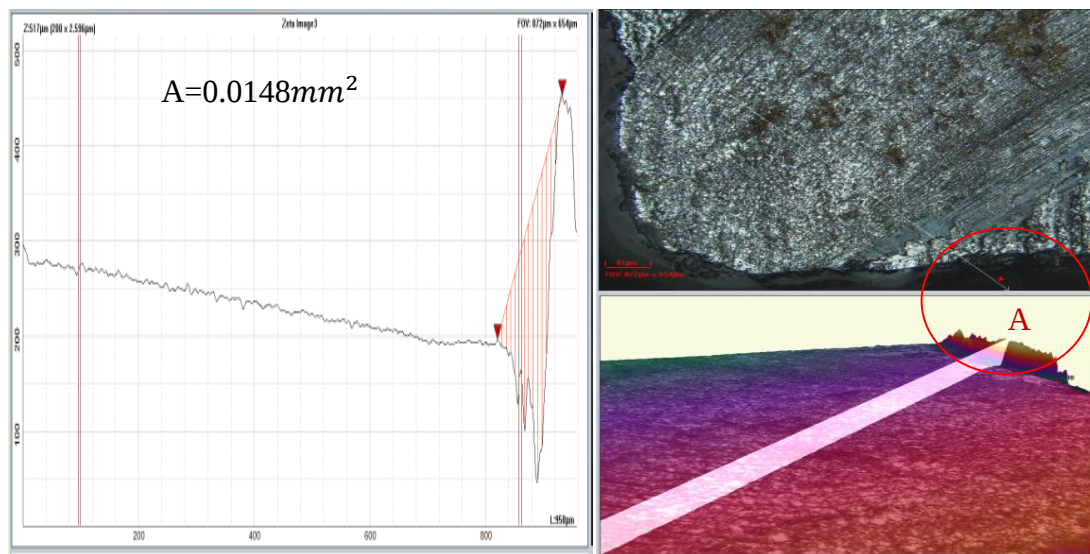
Flank wear of the 2nd cutting tool at 20X magnification (0.24 mm/rev feed and 1.25 depth of cut)
